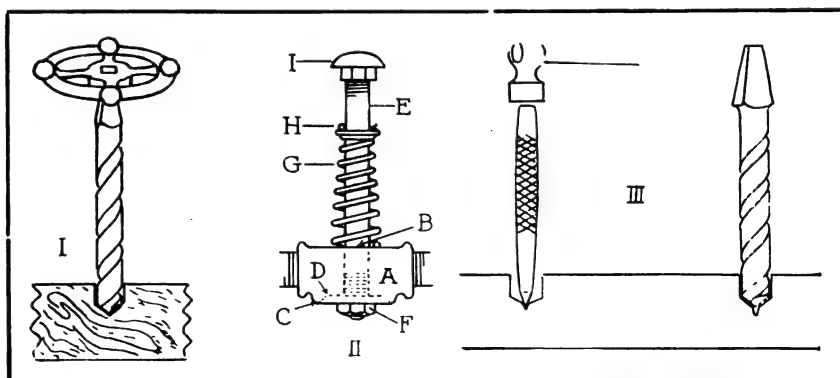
I, Turning Bit with Valve Wheel; II, Home-Made Exhaust Cut-Out; III, Drilling Metal by Hand.
